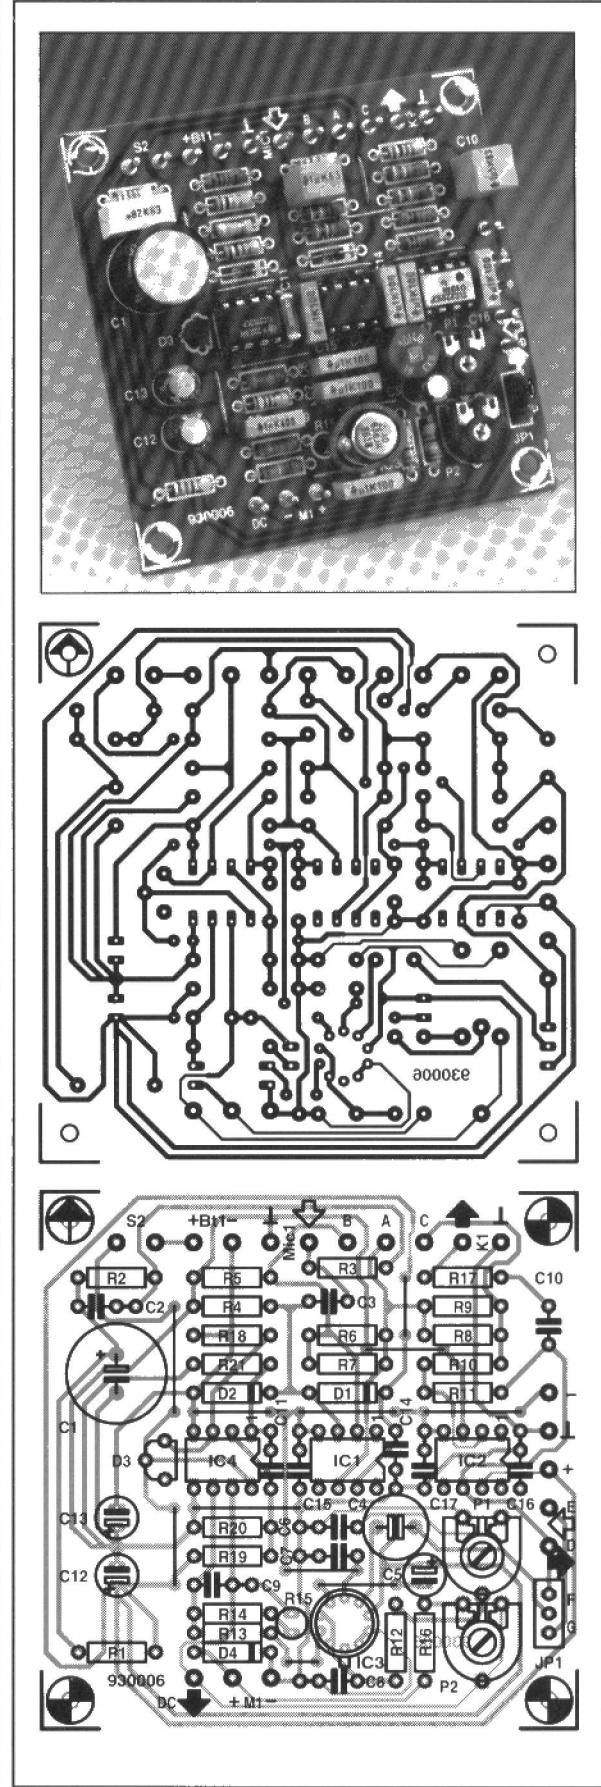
Printed-circuit board for the linear sound pressure meter.
